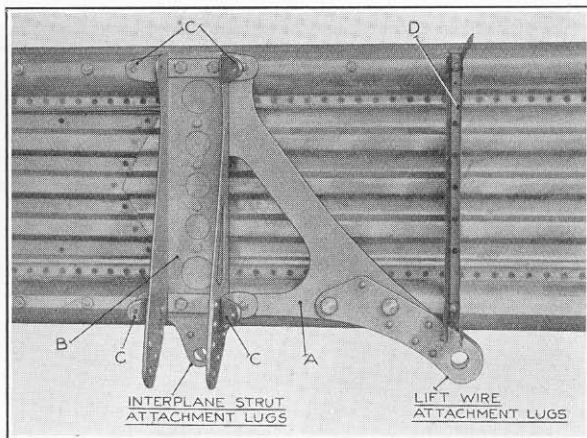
Top outer main plane front spar interplane strut and box rib attachment fitting (port).
